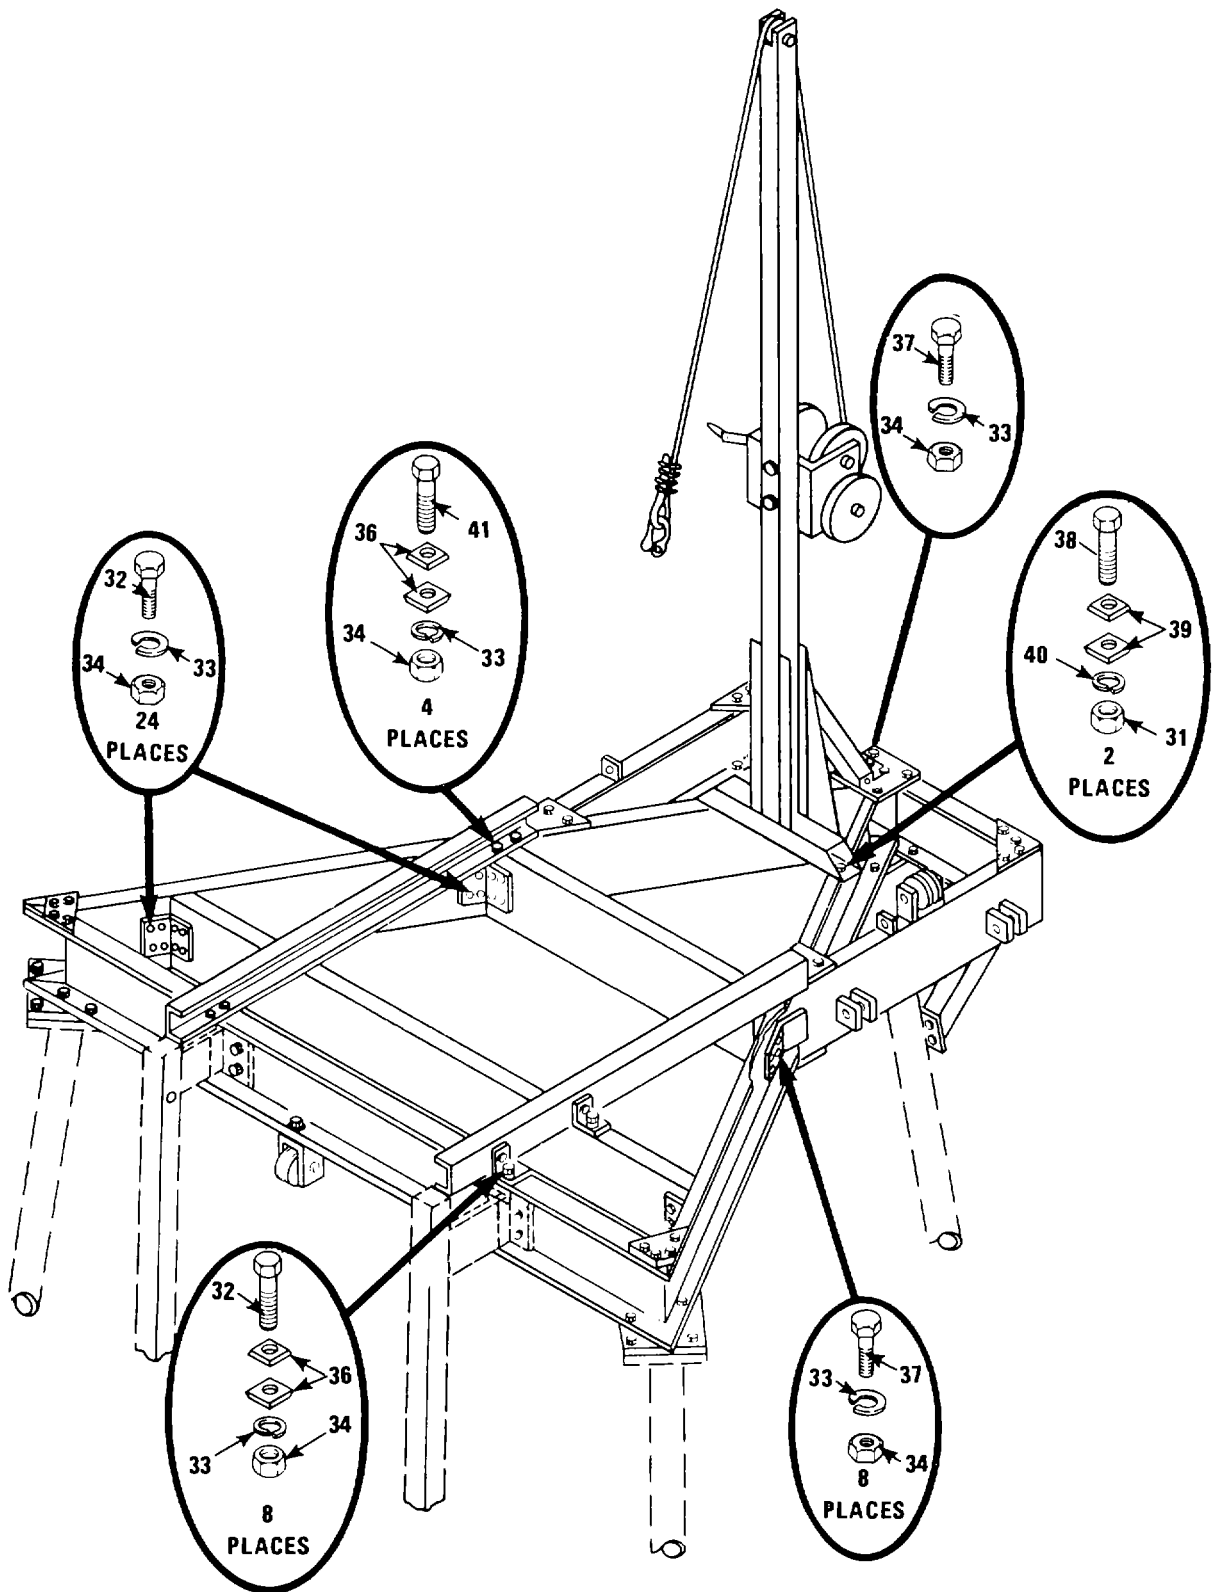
Tower Adapter Installation (Sheet 3 of 4)
